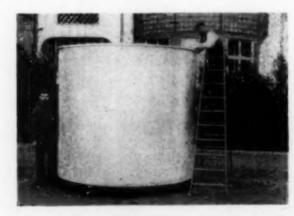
WELDED ALUMINIUM CONTAINER.
